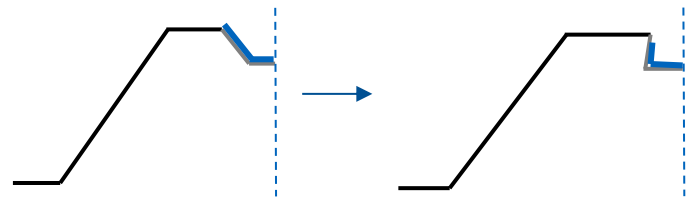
Conventional bead geometry (left) and undercut bead geometry (right)
